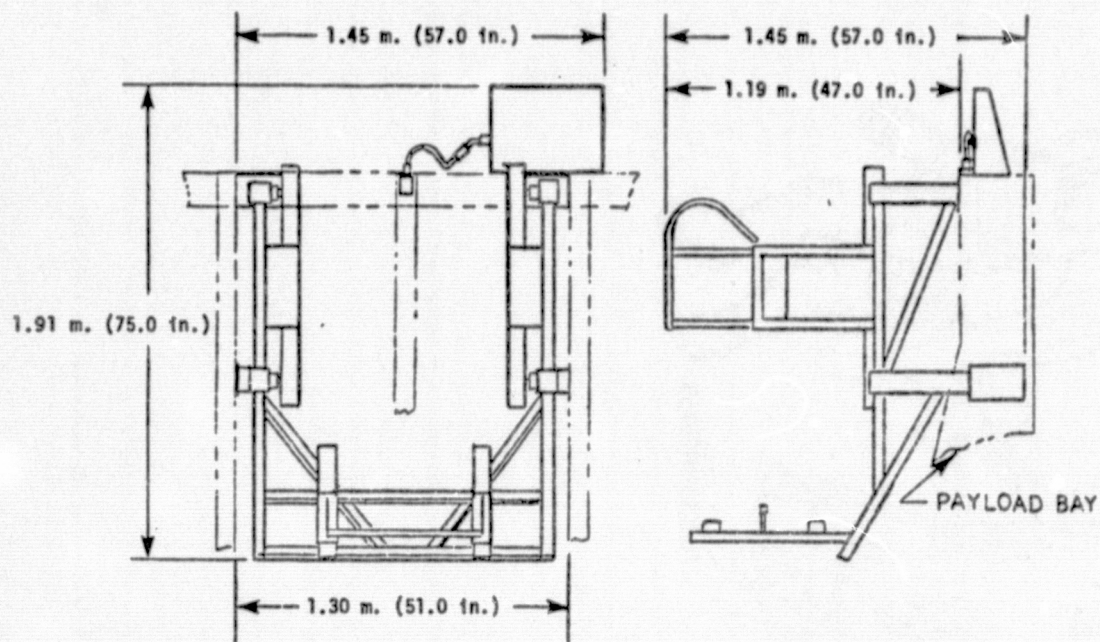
Flight Support System Overall Dimensions (Preliminary)
